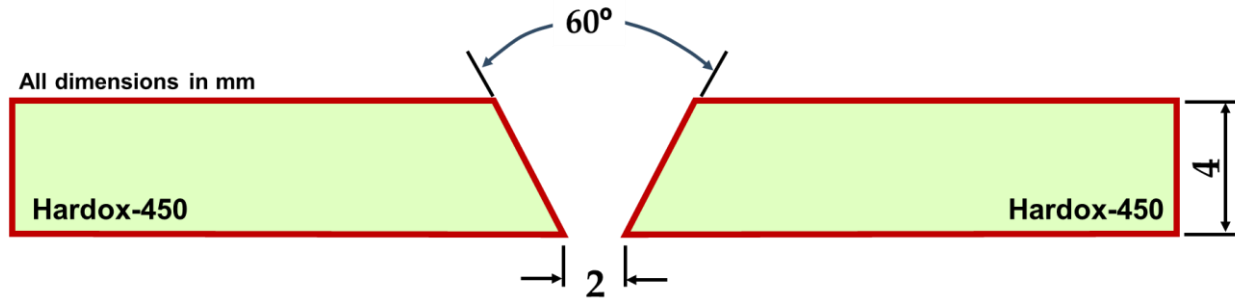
Schematic illustration of the single V-groove joint design employed for both the FCAW and SMAW welding processes (All dimensions in mm).
